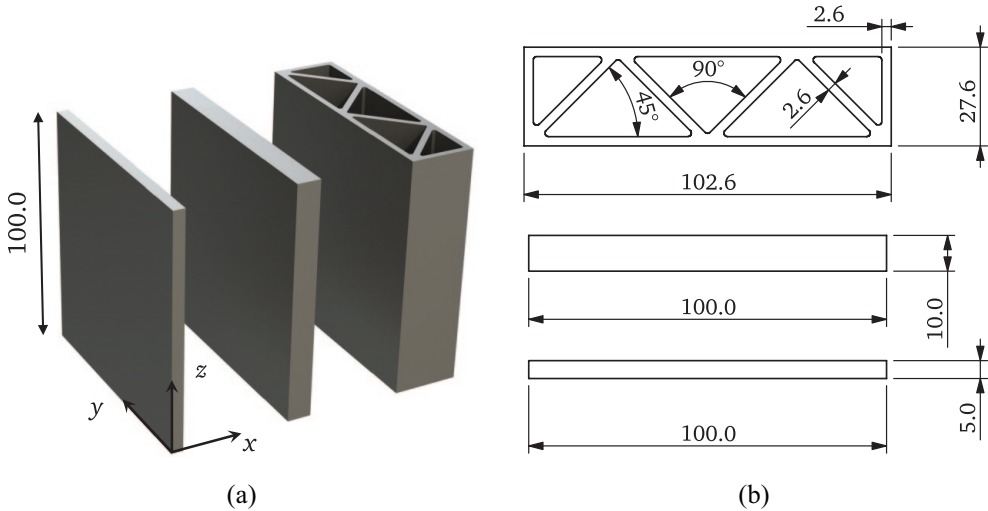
Geometry of AM maraging steel plates used in the ballistic impact tests, where: (a) shows a 3D render with the coordinate system and (b) the cross-sectional geometries of the plates (all linear dimensions in mm).
